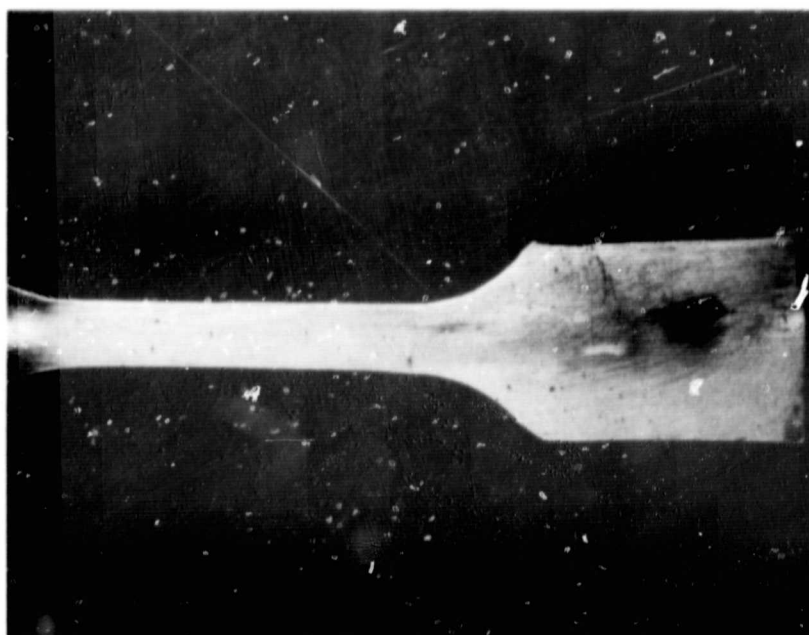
7 mil Solder Sample After Surface Coating of Mercury.
